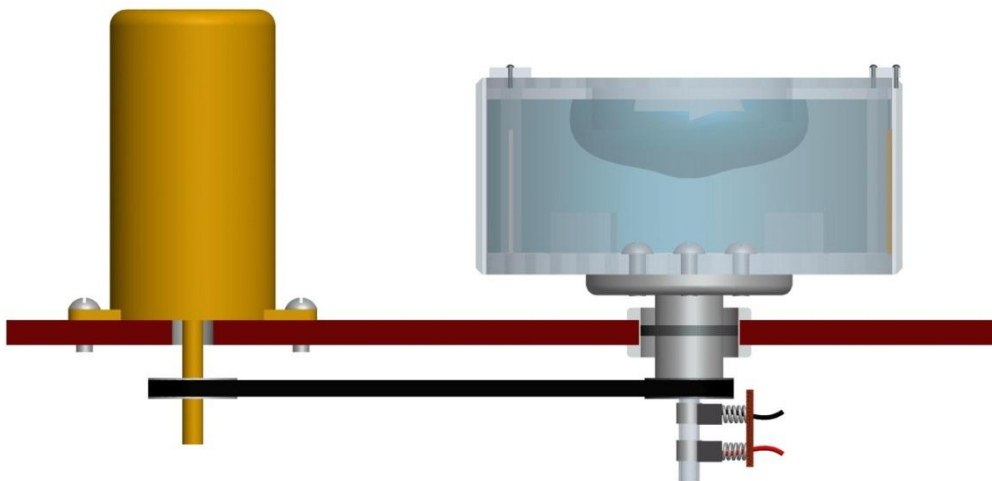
Side Sectioned view of the Centrifugal cell with motor assembly.
